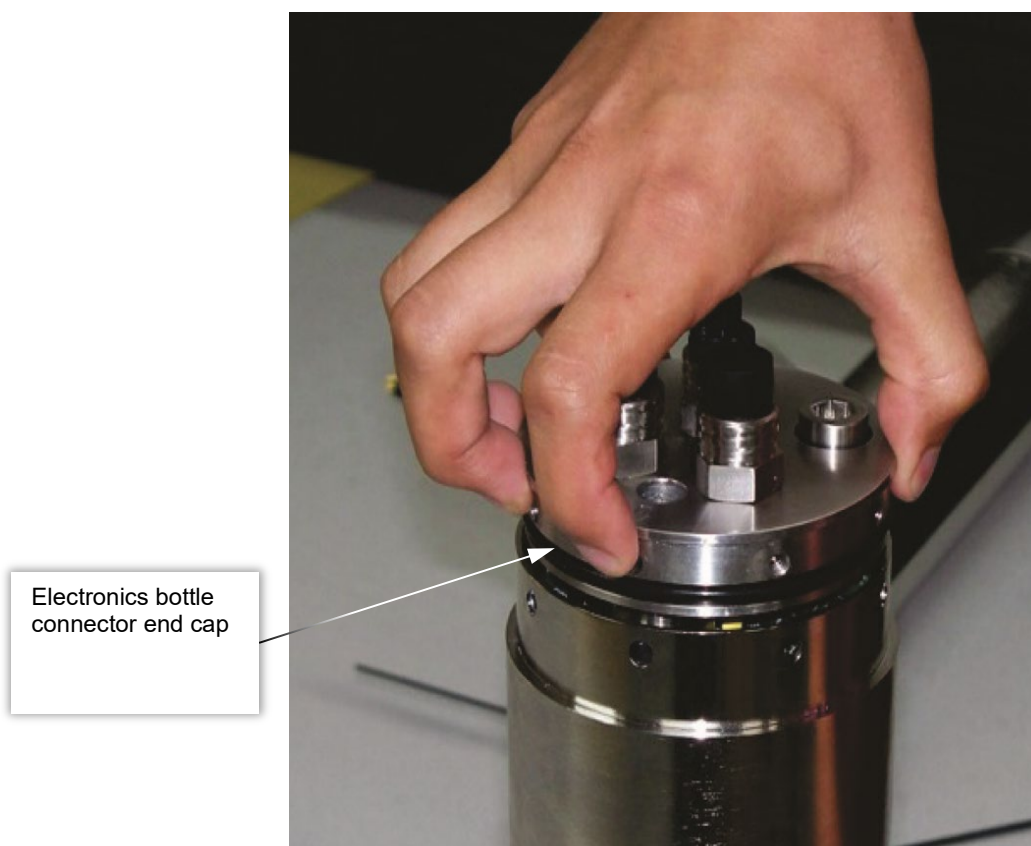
Removing the Electronics Chassis from the Electronics Bottle
